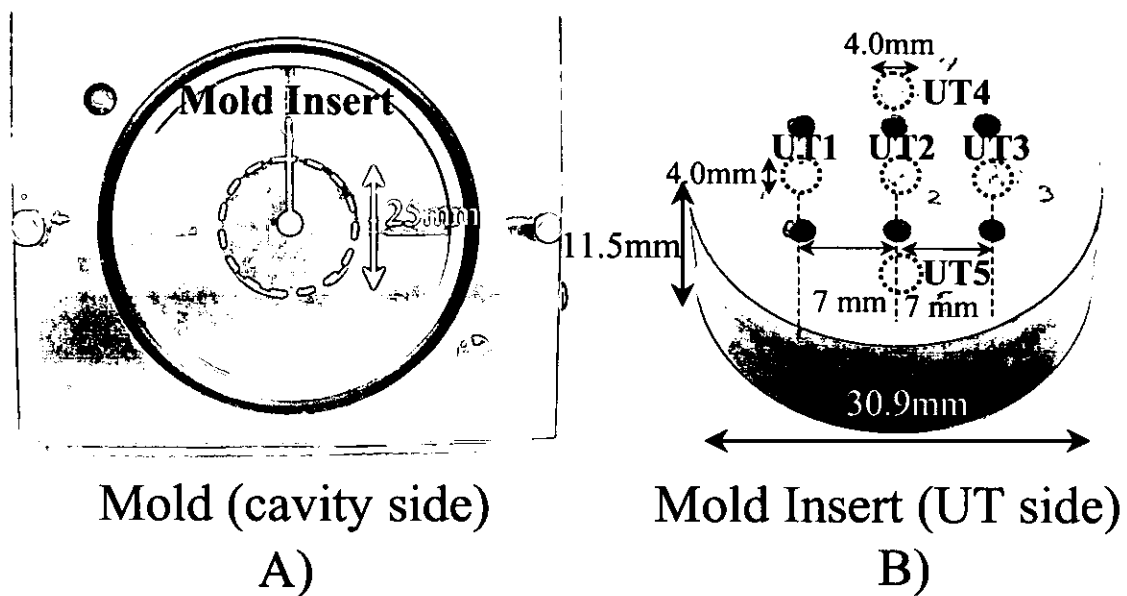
Photographs of A) a mold with the mold insert (indicated by white dotted circle area) at cavity side and B) a mold insert with five UTs at UT side.
